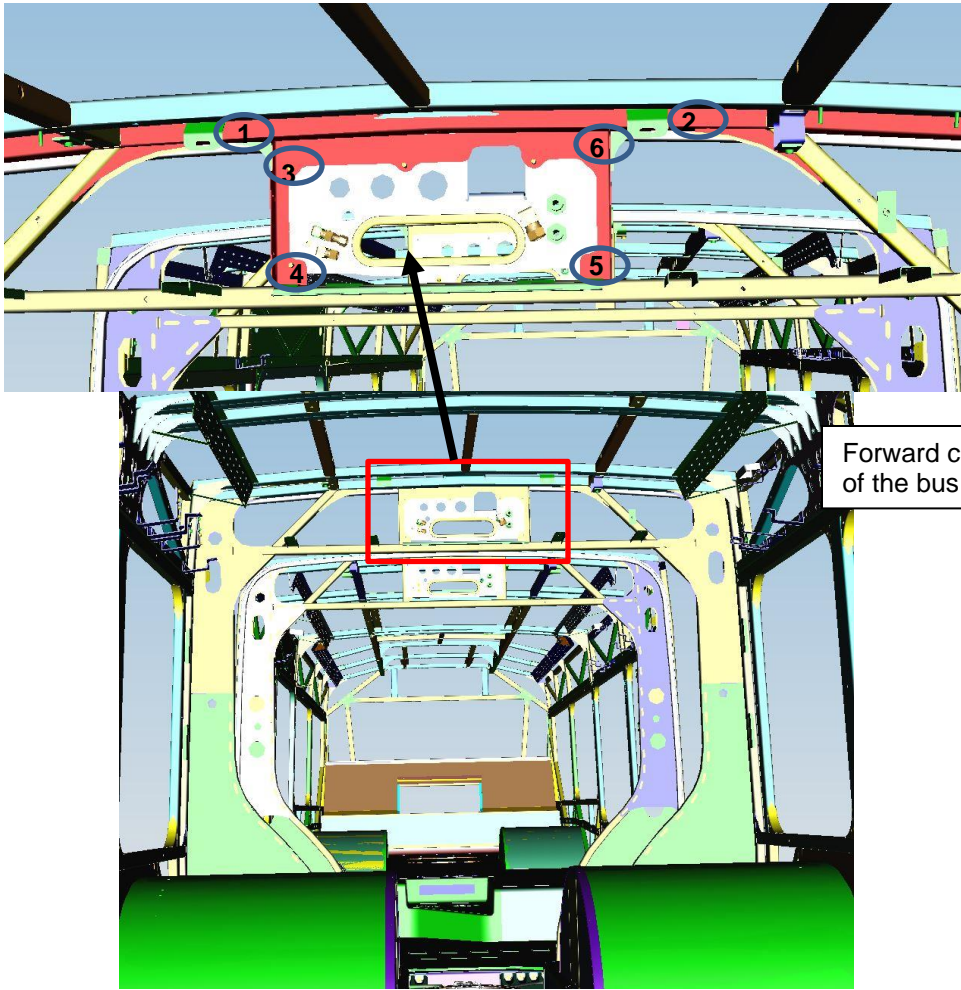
SHOWN INTERIOR COVERS TO BE REMOVED TO GAIN ACCESS
